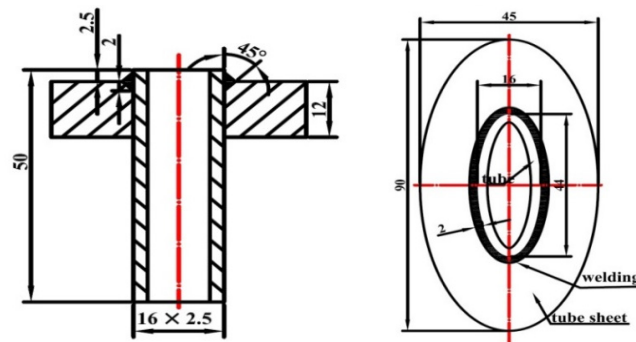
Geometry and dimensions of the tube and tube sheet weld.
